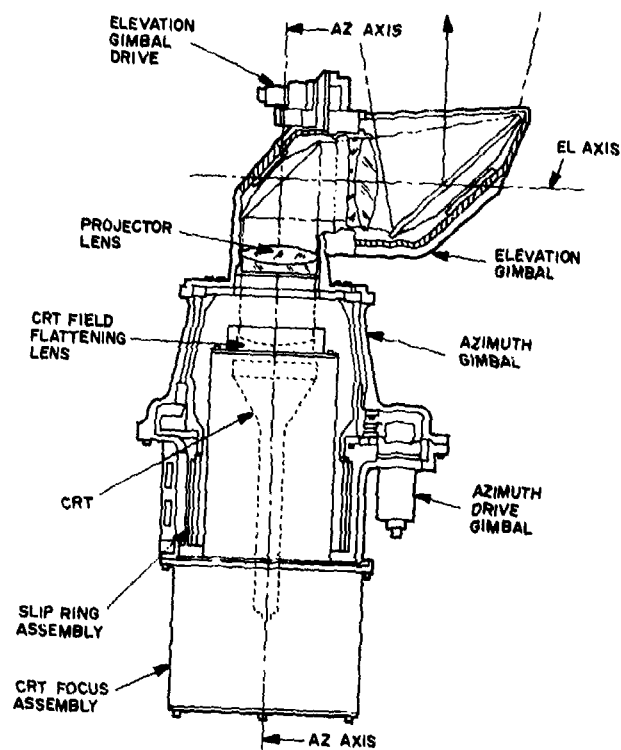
Outline Drawing of Projector Head Showing Typical Steering Optics
